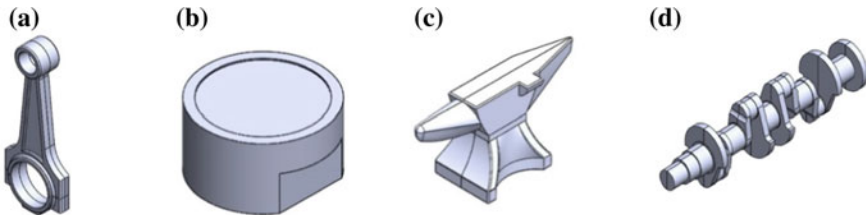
New patterns. Connecting rod (a), piston (b), anvil (c) and crankshaft (d)
